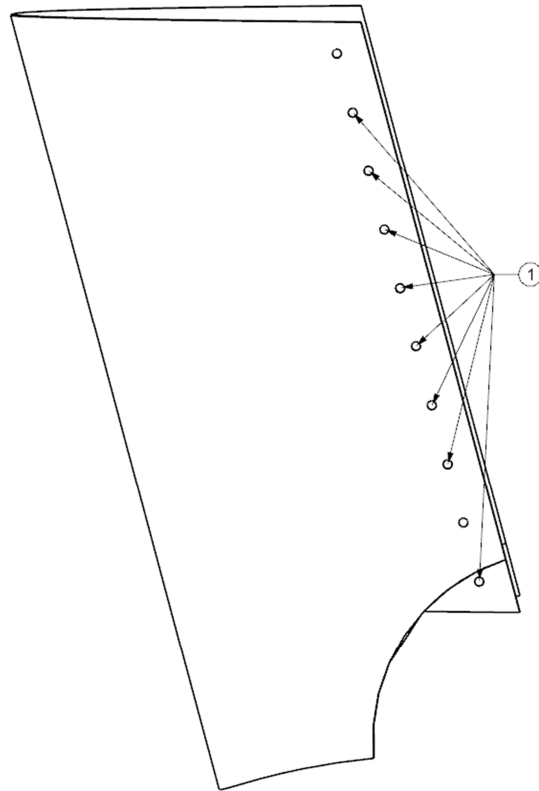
Center Wing Pylon Leading Edge Fastener Placement
